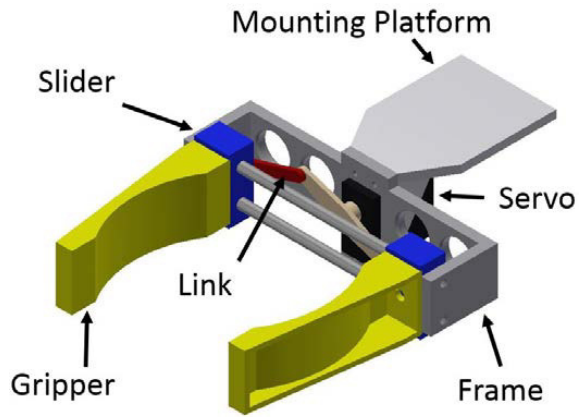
The final design constrains gripper travel using a pair of bearing shafts.
